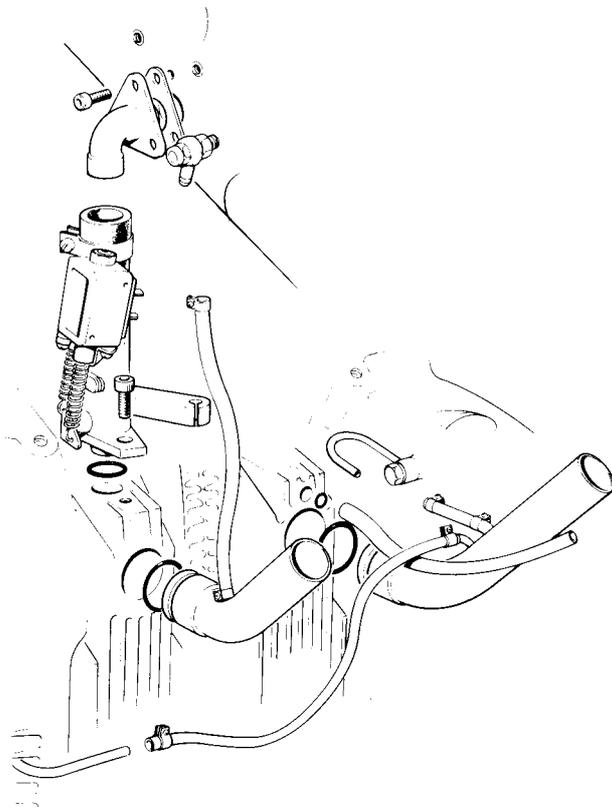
Removing the single rotor idling valve assembly, inlet, idle and oil drain pipes
